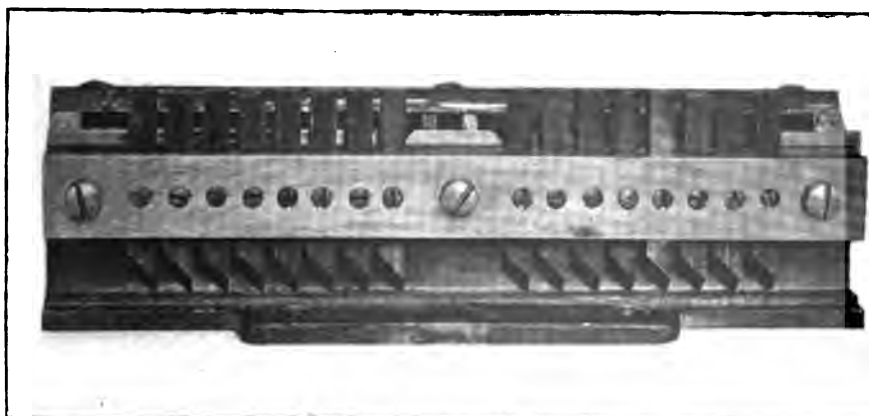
Grinding jig designed by William G. Thumm. Especially adapted for grinding inserted cutters for a large face mill.
